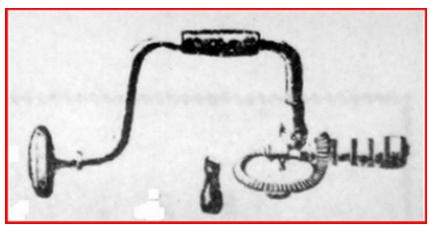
A very old image (drawing) that will look very blurred once printed in the magazine. I include this because the chuck shown matches the patent date, Nov.5, 1872 and the only one I have seen on a Quimby Backus Drill Brace.
